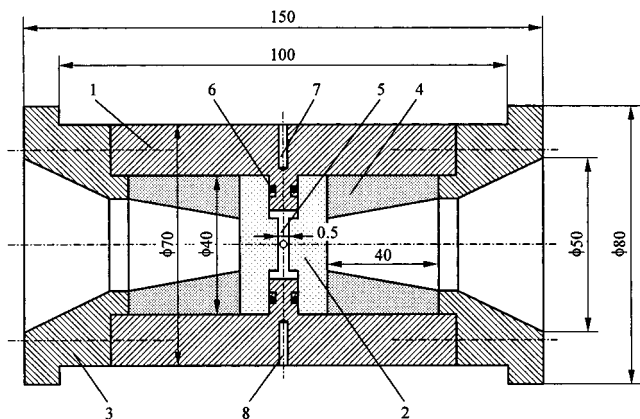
Schematic of the test cell. (1) Cylinder of stainless steel; (2) glass window; (3) mounting ring; (4) connecting piece; (5) sample volume; (6) sealing O-ring; (7, 8) bores for Pt-100 resistance thermometers. Dimensions are in millimeters.
